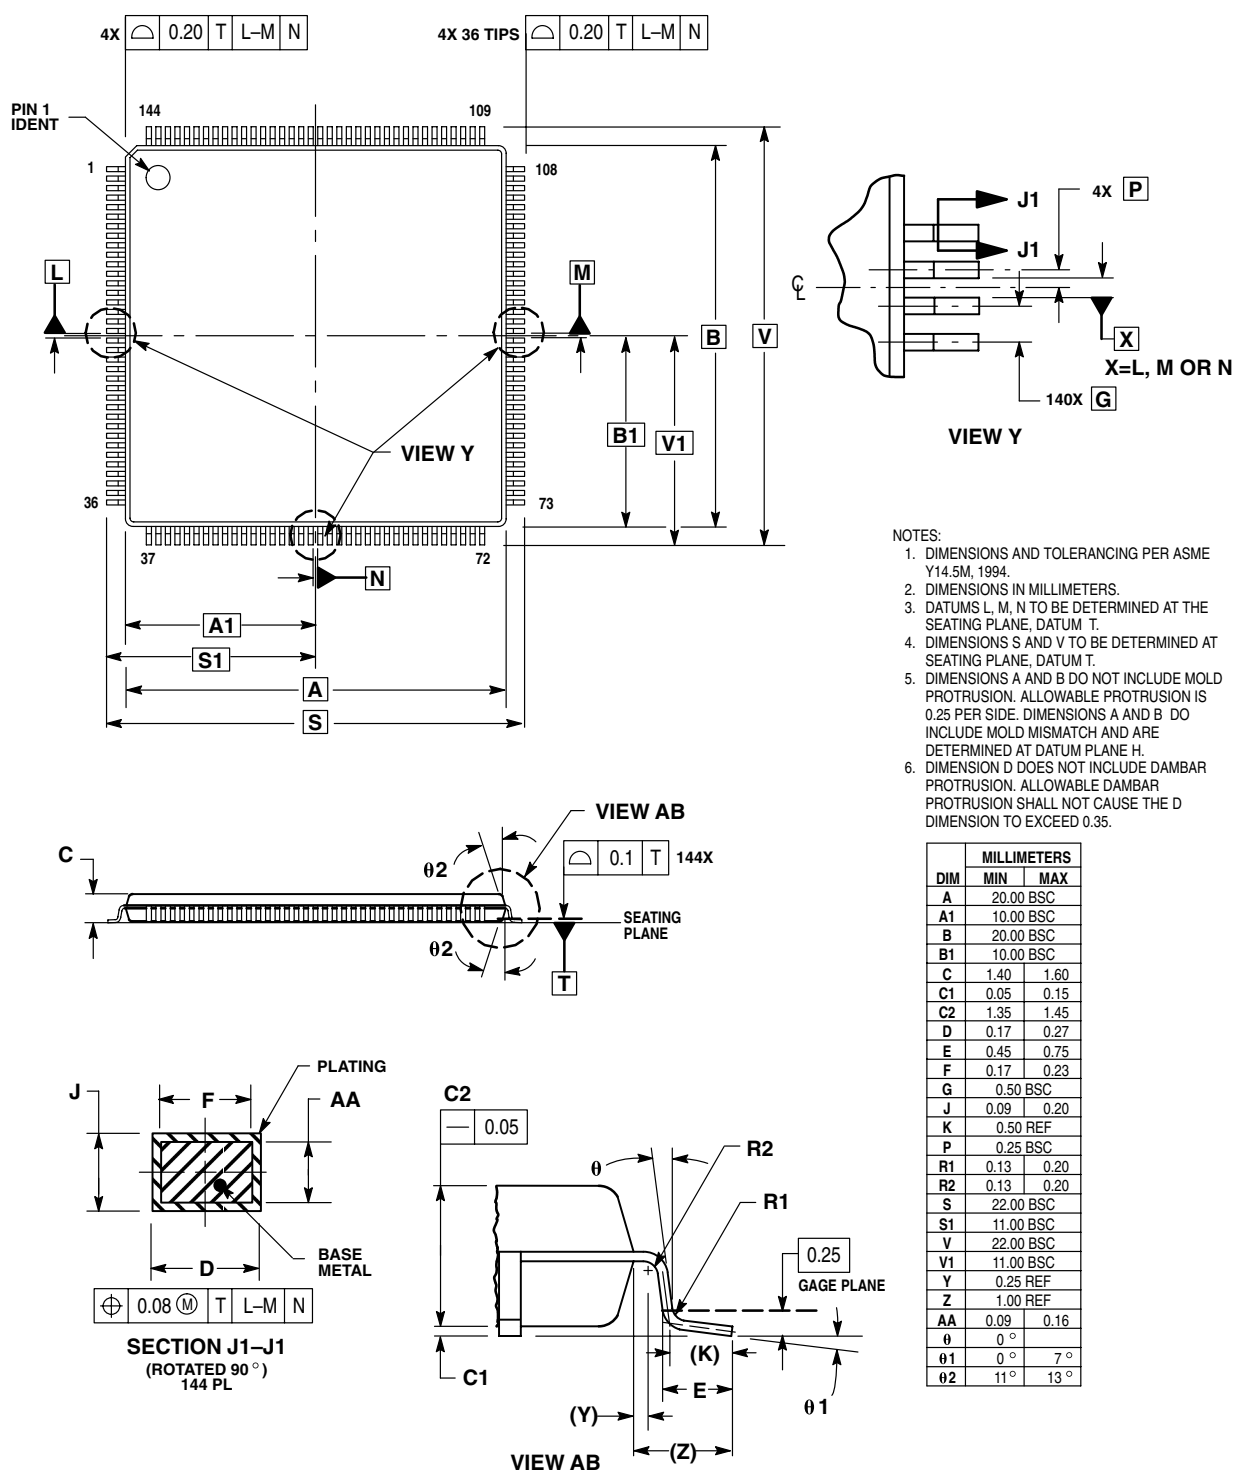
144-Pin Package Dimensions Thin Quad Flat Pack — Case 918-02
